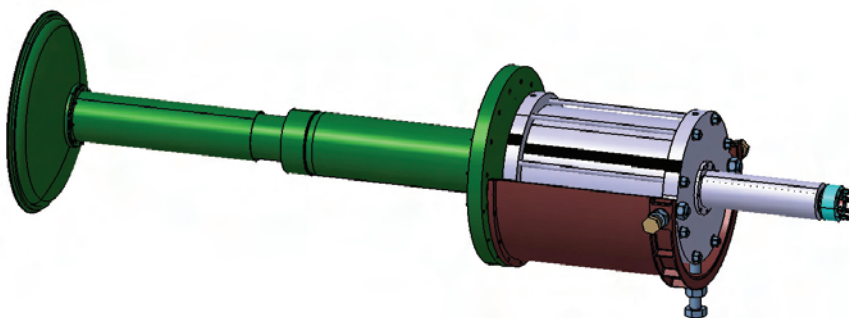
Inlet valve subassembly of the pre-production cryopump.
